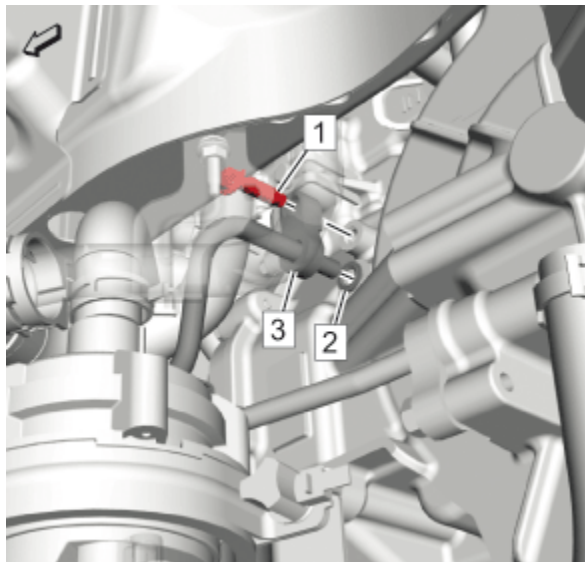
Transmission Fluid Cooler Inlet Pipe, Bolt And Sealing Washer
